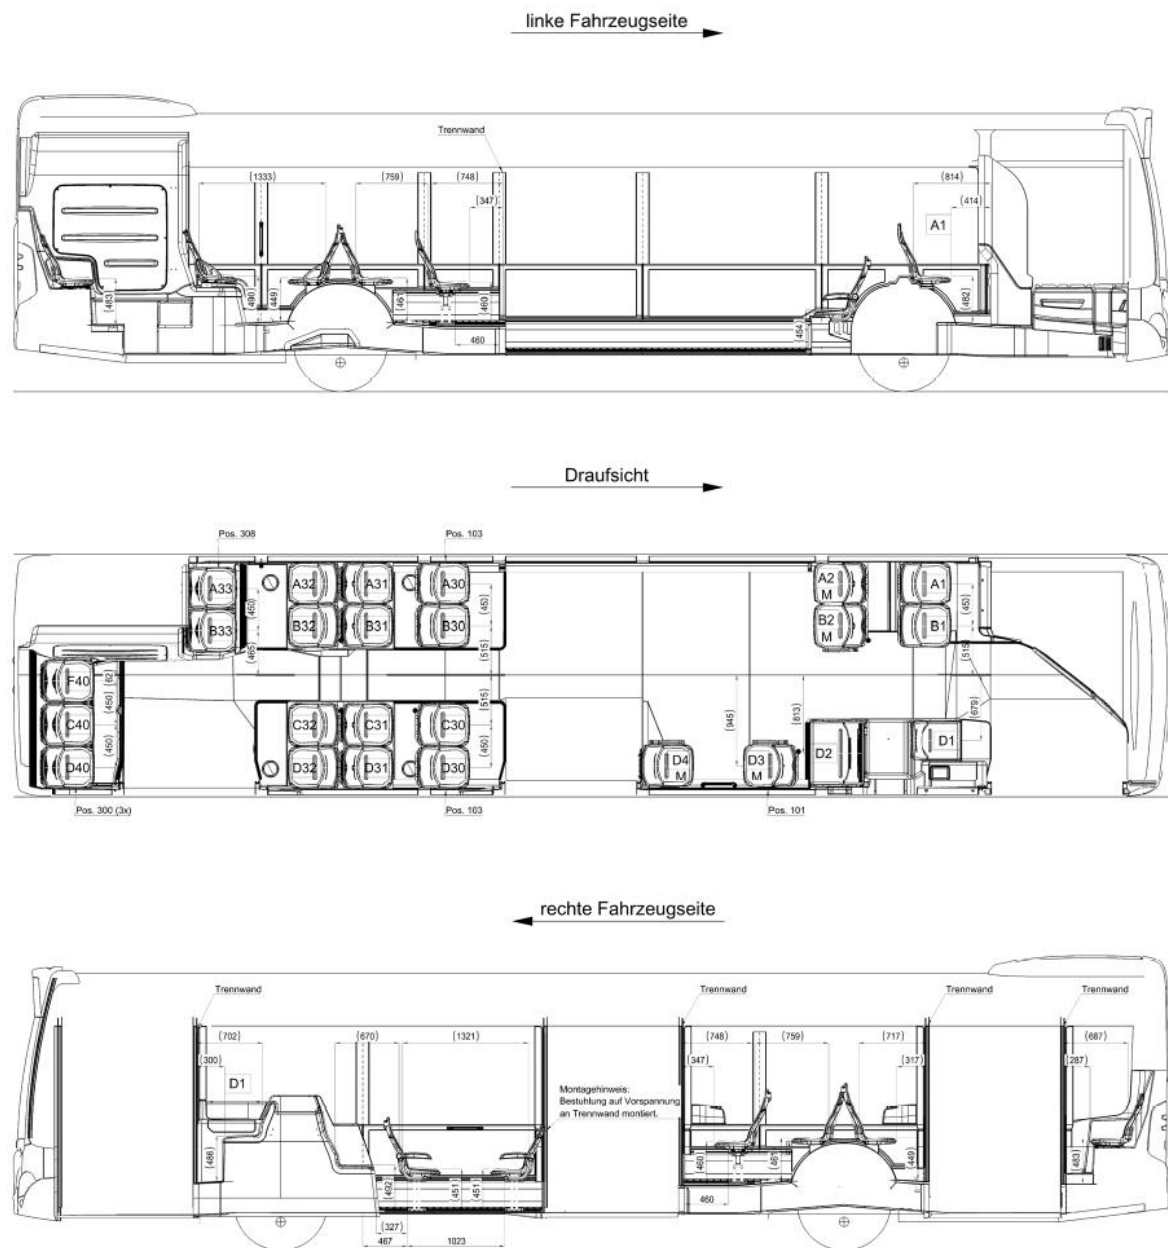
Technical floor plan of Class I Simple Urban Bus.
